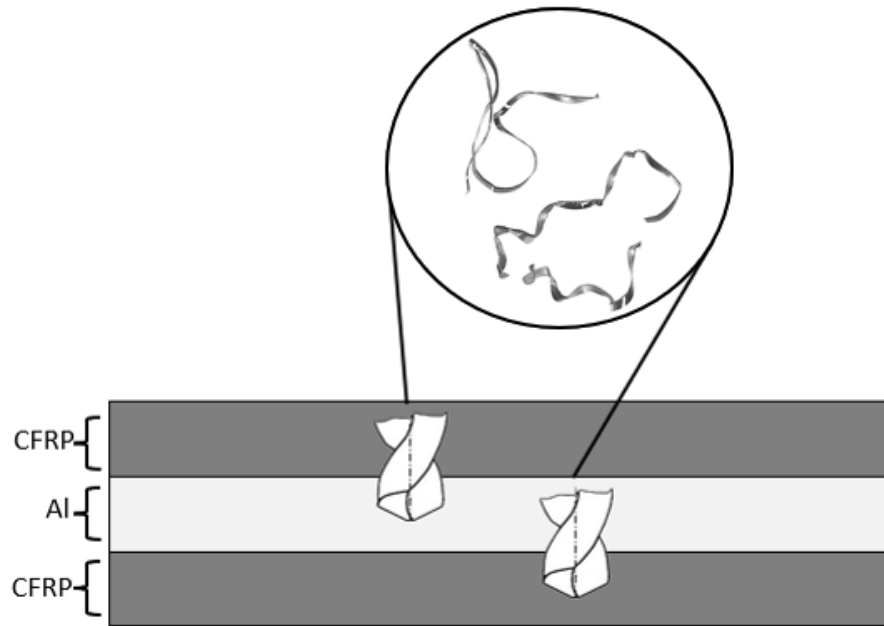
Chip geometry in different stages during the drilling of the configuration type I with the drilling tool 2 with the drilling parameters: feed – 0.05 mm/rev and cutting speed – 300 m/min.
